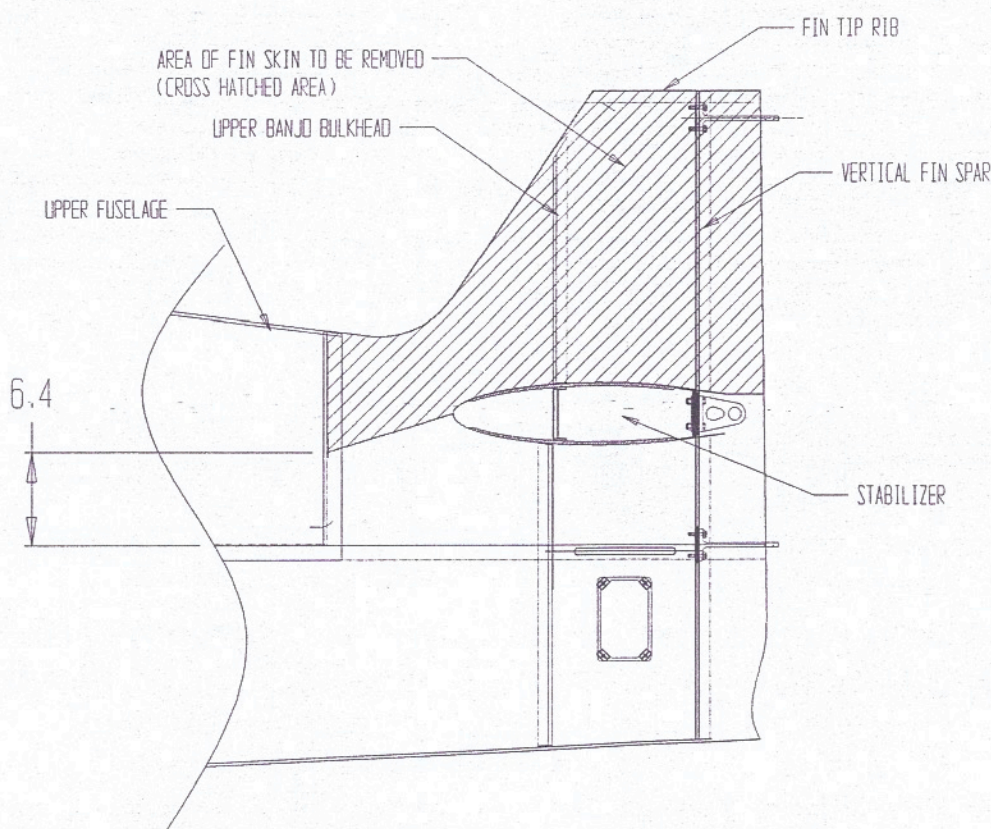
Side view of vertical fin showing internal components and area of fin skin to be removed
